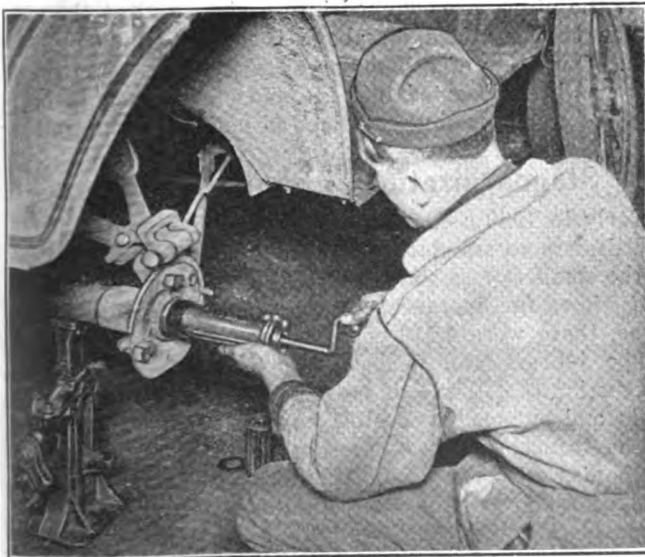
PULLING THE ROLLER BEARING SLEEVE FROM A FORD REAR AXLE
